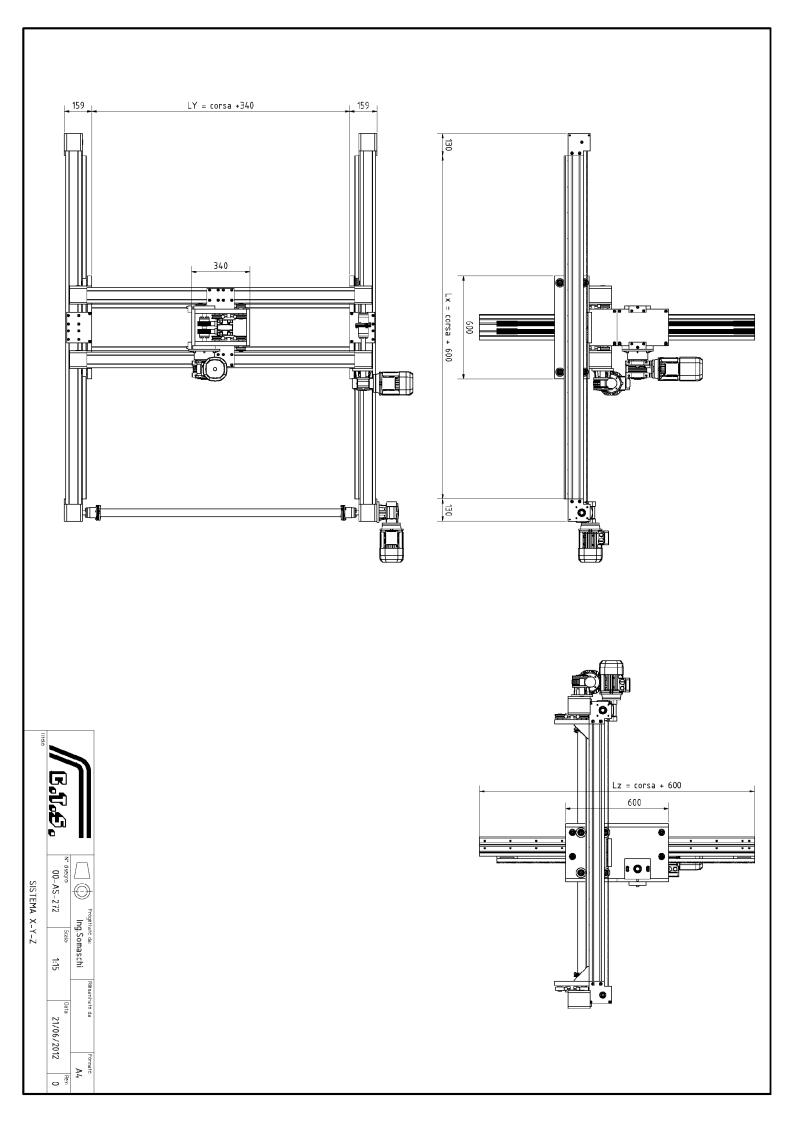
AS-272 HEAVY VERSION WITH AD416 GUIDES
